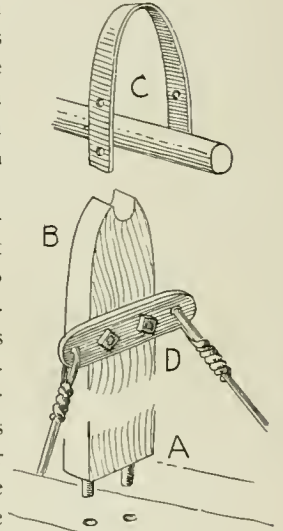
DETAILS OF FLOOR HORIZONTAL BAR.
